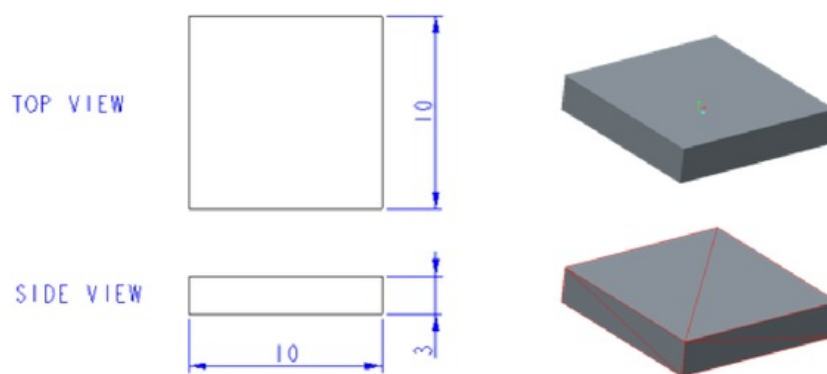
Left: Dimensions of 3D Printed Test Samples (In Millimetres). Right: CAD and STL Models of Test Samples
